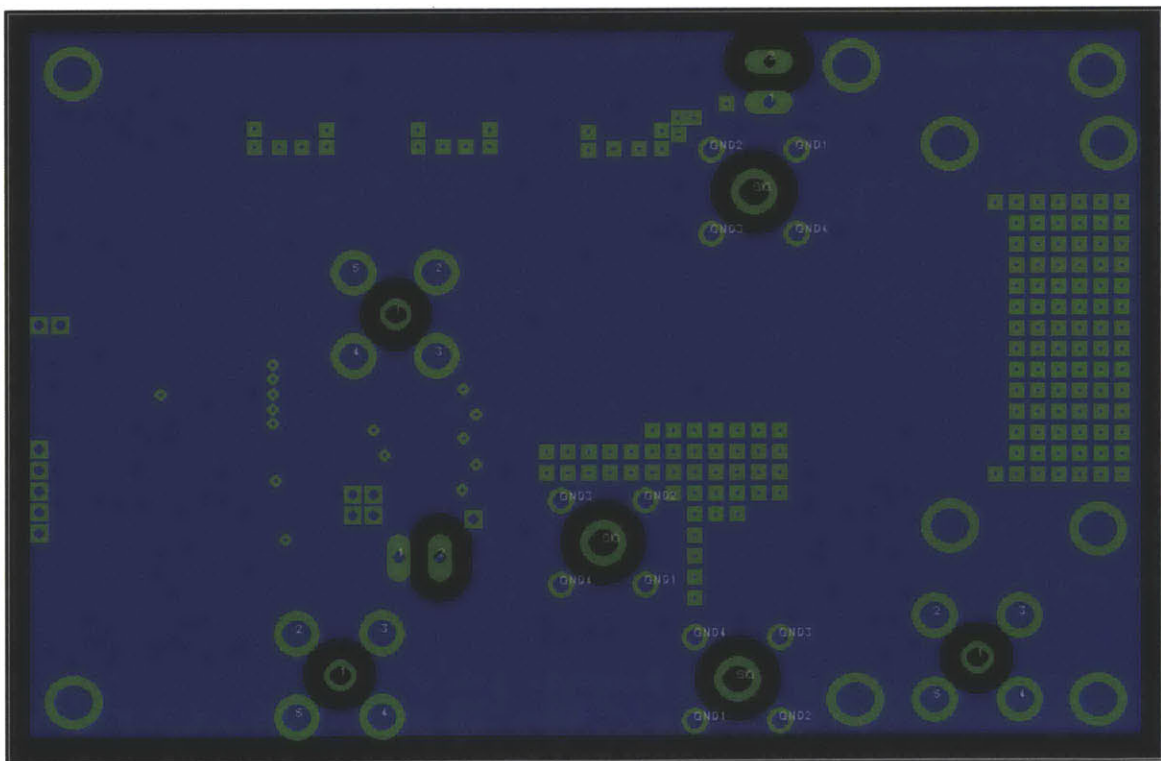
Class-E PCB (bottom layer copper/silkscreen)
